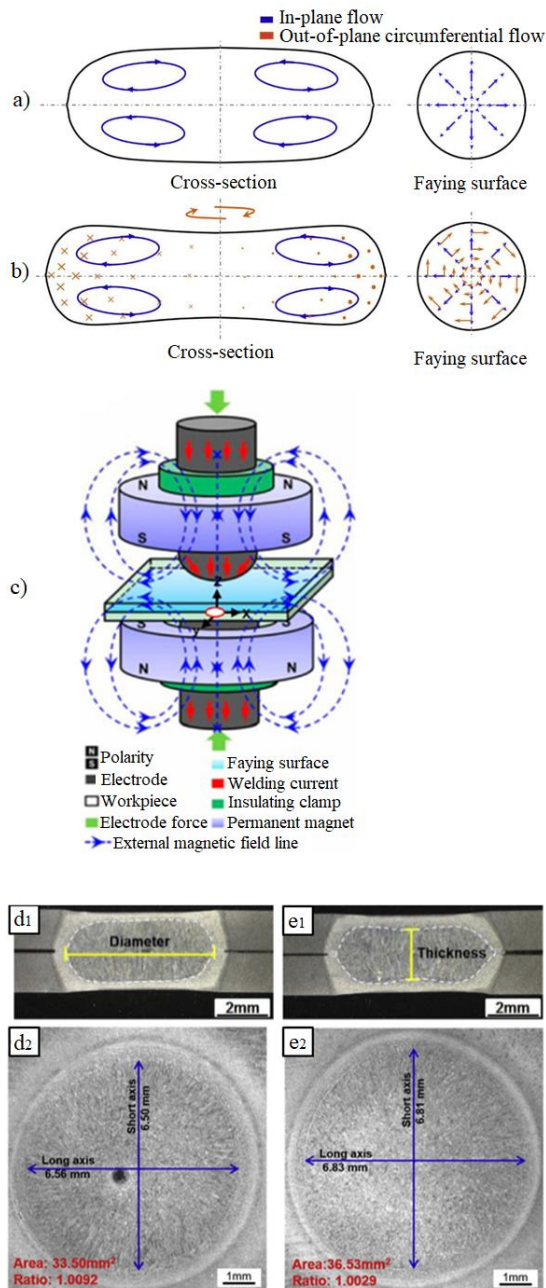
Molten metal flow patterns in a) traditional RSW and b) MA-RSW nugget. A schematic illustration of c) MA-RSW welding. Weld nugget of d) traditional RSW and e) MA-RSW [40]
